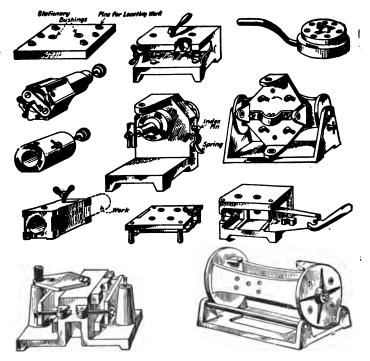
Examples of drill jigs. (Courtesy, Publishers, Halsey's "Methods of Machine Work.")
